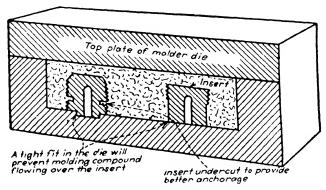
Designing the mold with a recess which holds the insert tightly will prevent the molding compound flowing over the insert when molding pressure is applied.
